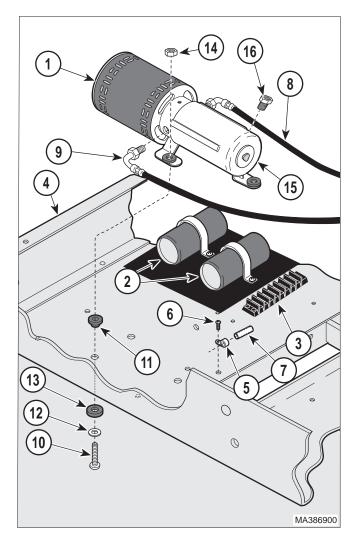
Hydraulic Motor / Pump Removal / Installation
